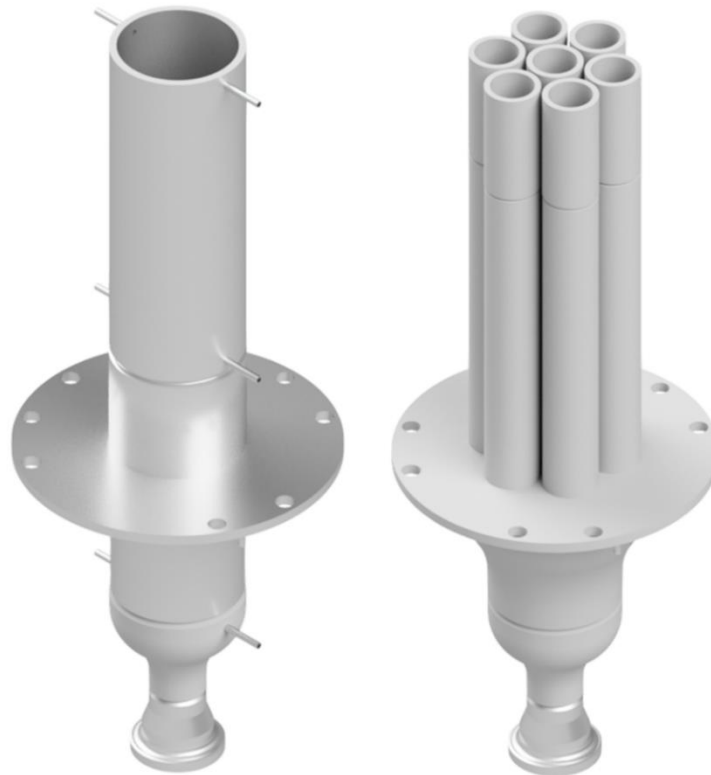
Two 3D model views of F-STAr with the Full-Scaled Test Section installed.
